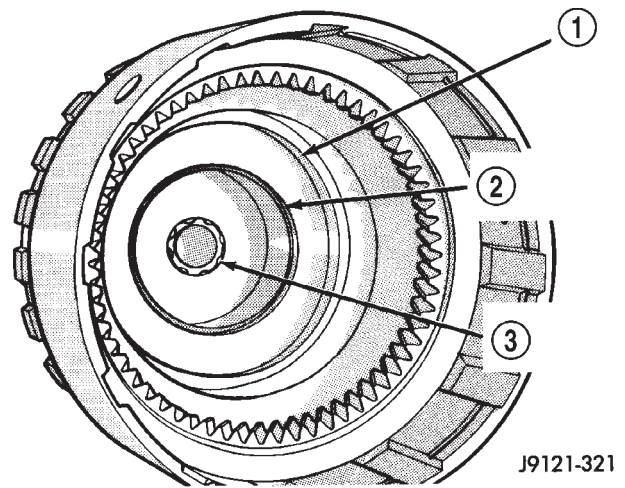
Marking Annulus Gear And Output Shaft For Assembly Alignment
